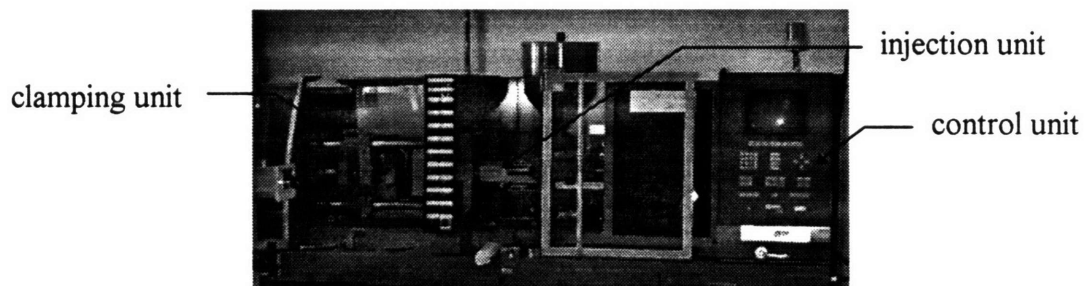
Engel EC88, 30 ton injection molding machine.
